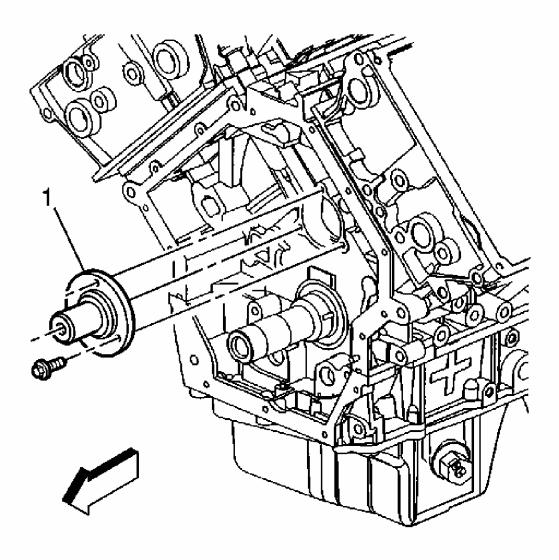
Identifying Camshaft Intermediate Driveshaft Courtesy of GENERAL MOTORS CORP.
